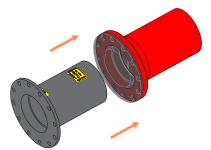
Model RF-DBI-LH Flanged Installation Step 1
